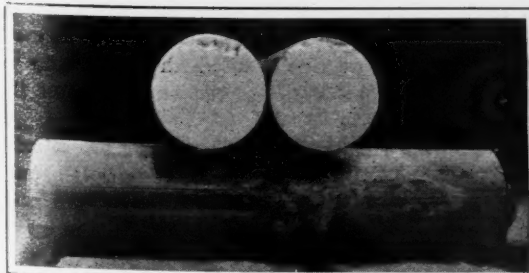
View showing End of Billets broken off in Alligator Shear, indicating Character of Clean, Smooth Break
